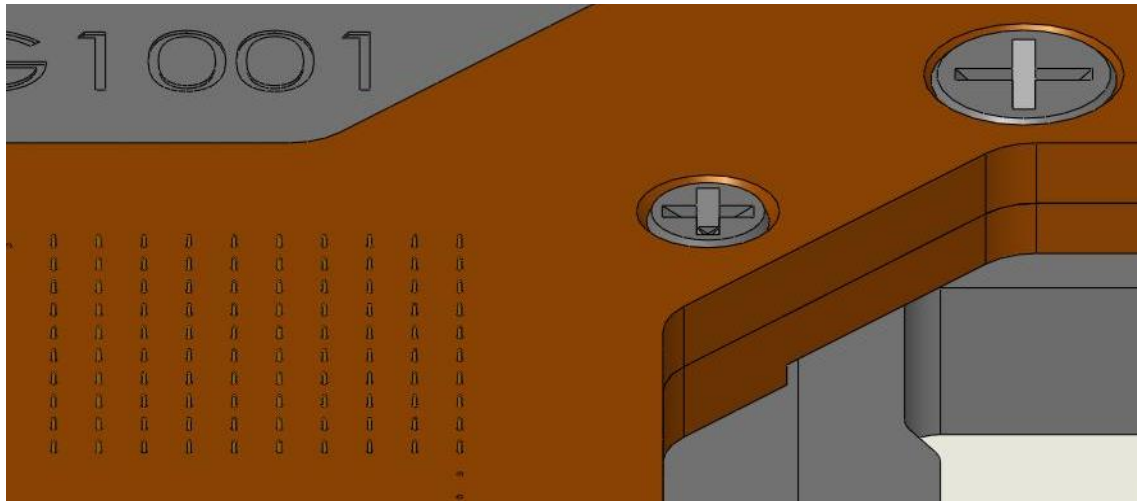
Countersunk #0 and M2 assembly screws on the bottom side of the socket.
